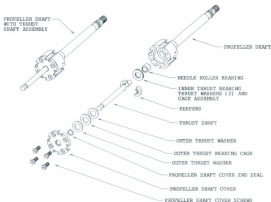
Thrust and needle bearings, and thrust shaft arrangement.
